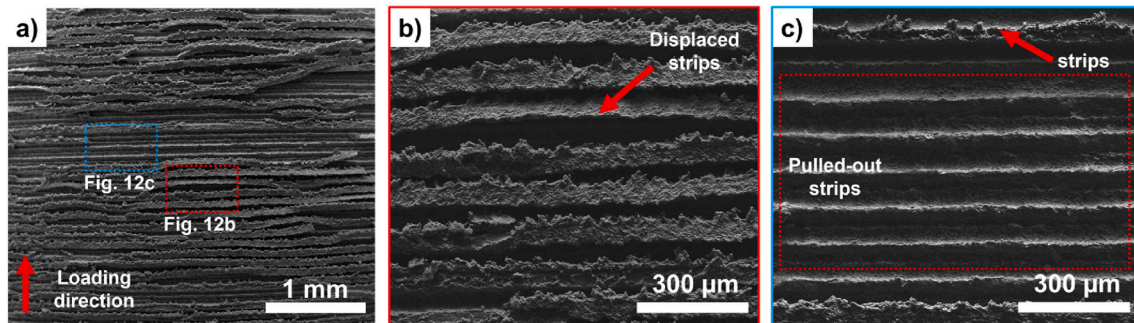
Scanning electron microscopy (SEM) images (secondary electrons) of the metal fracture surface of the PC/AA6061 joint produced with optimized injection overmolding condition (C4). a) Image with indications of cohesive fracture; b) Magnification of the region marked with red square where the strips were displaced; c) Magnification of the region marked with blue square where the strips were pulled out.
